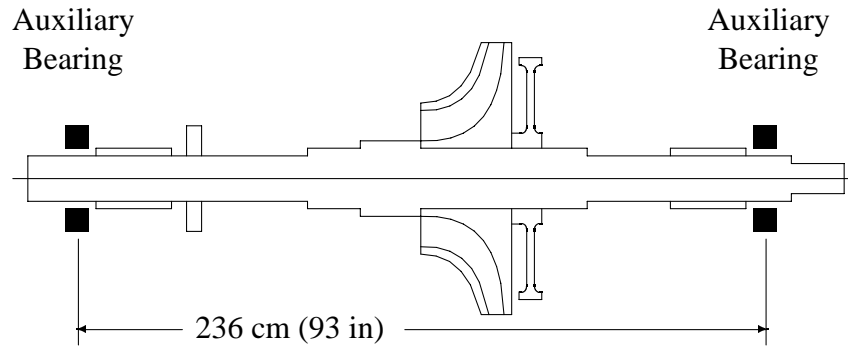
Compressor layout, showing impeller, balance piston, thrust bearing, and auxiliary bearing locations.
